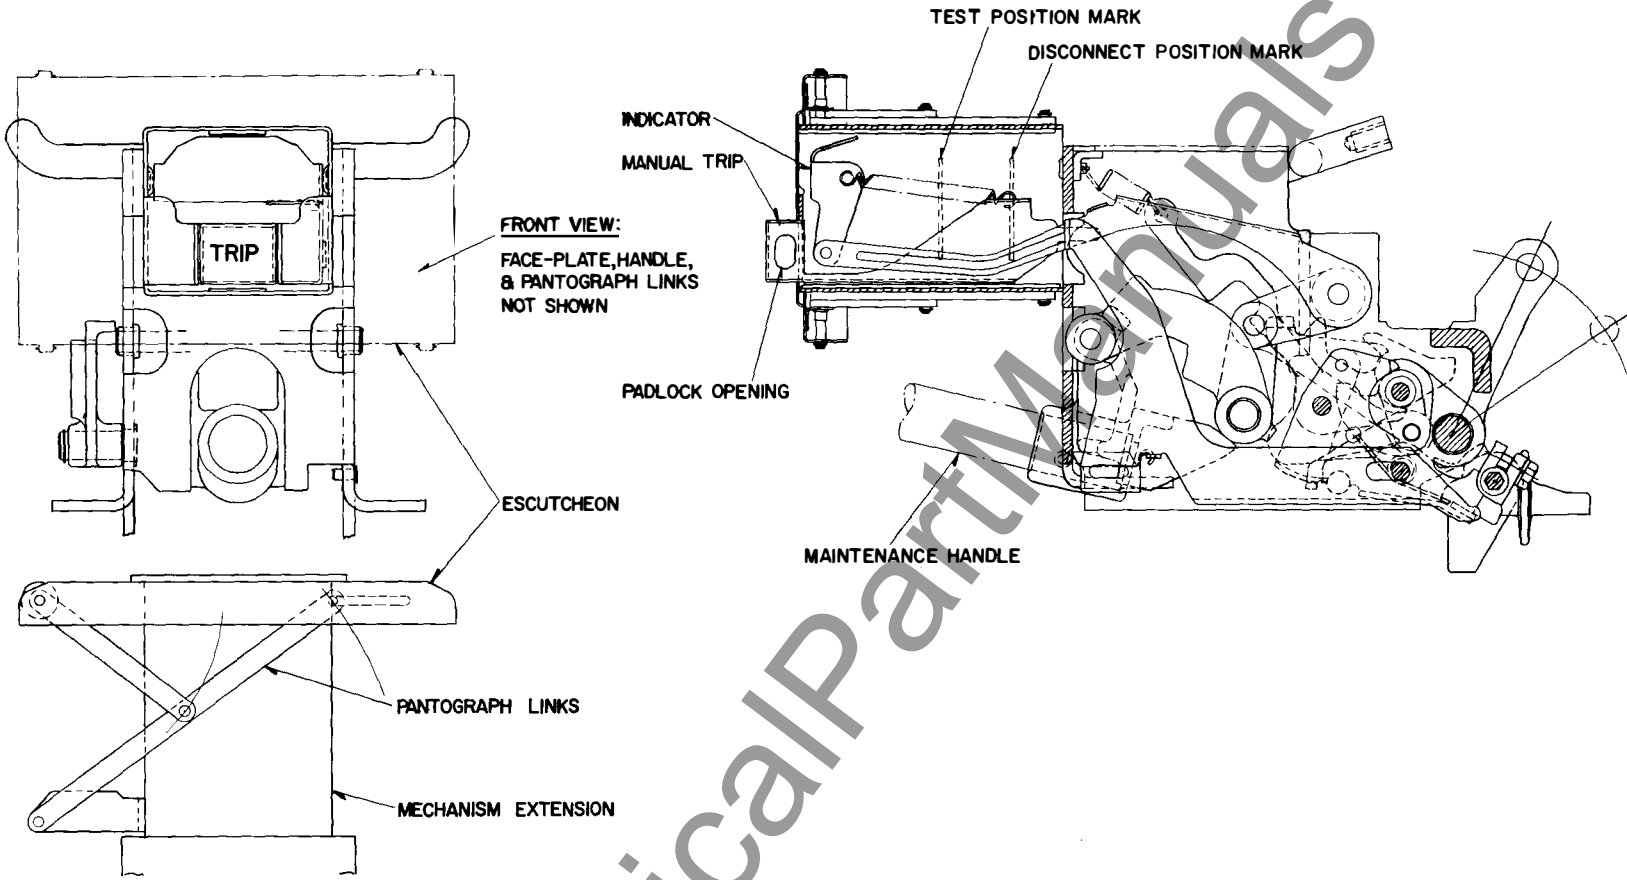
Type DB-75 and DB-100 Three Position Operating Mechanism.
